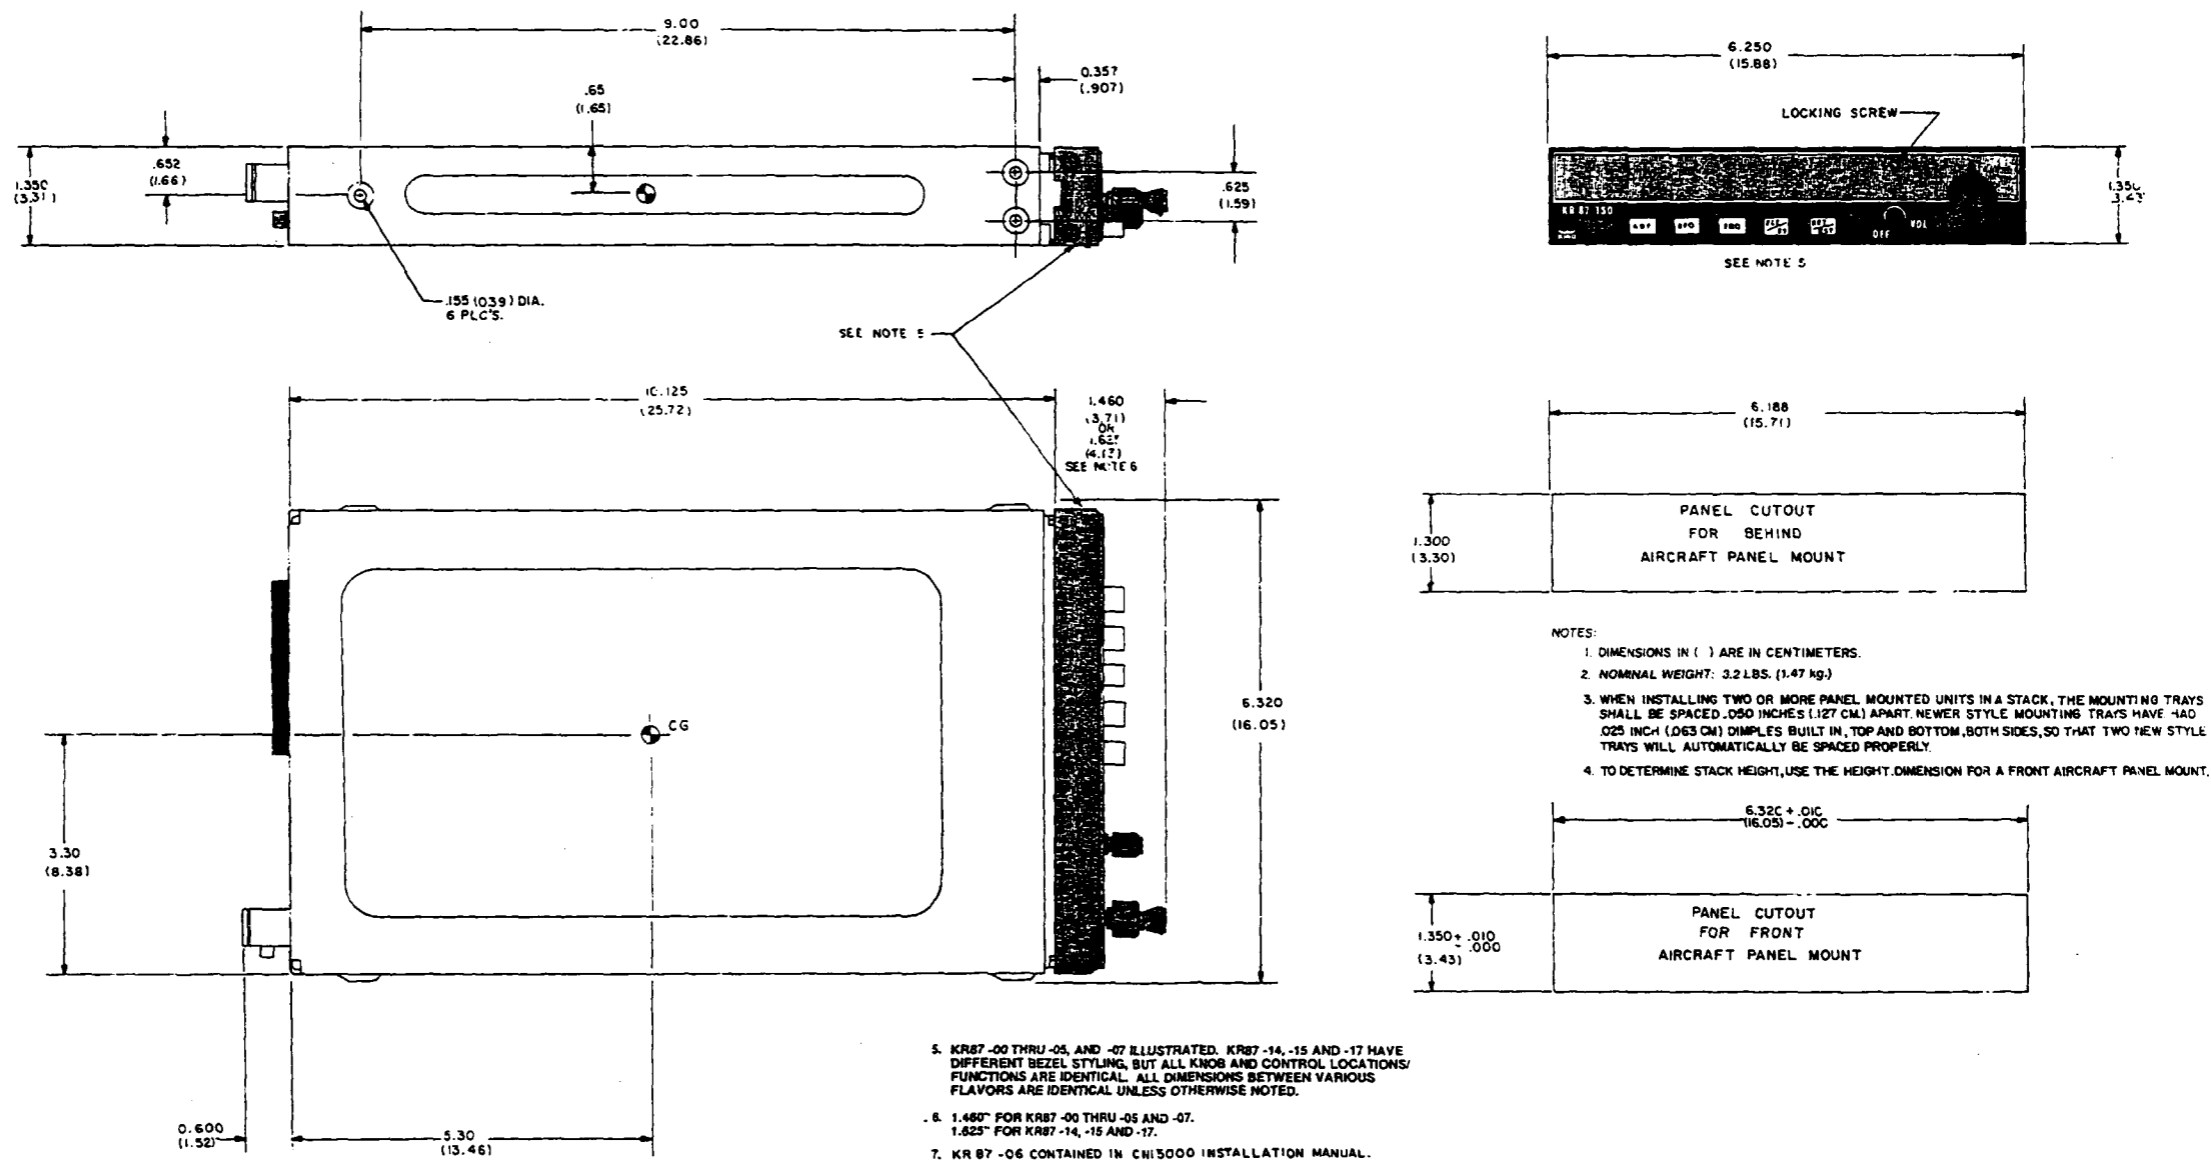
KR 87 OUTLINE AND MOUNTING DRAWING
